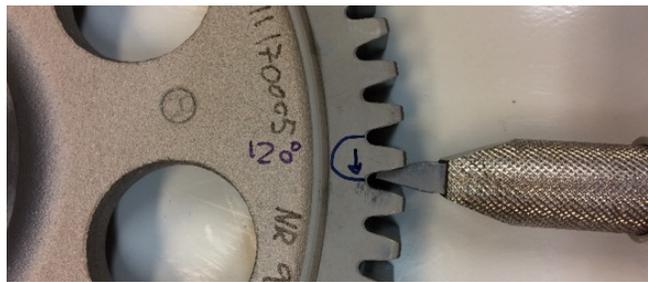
Overview of the measurement setup for gear tooth flank measurements.
